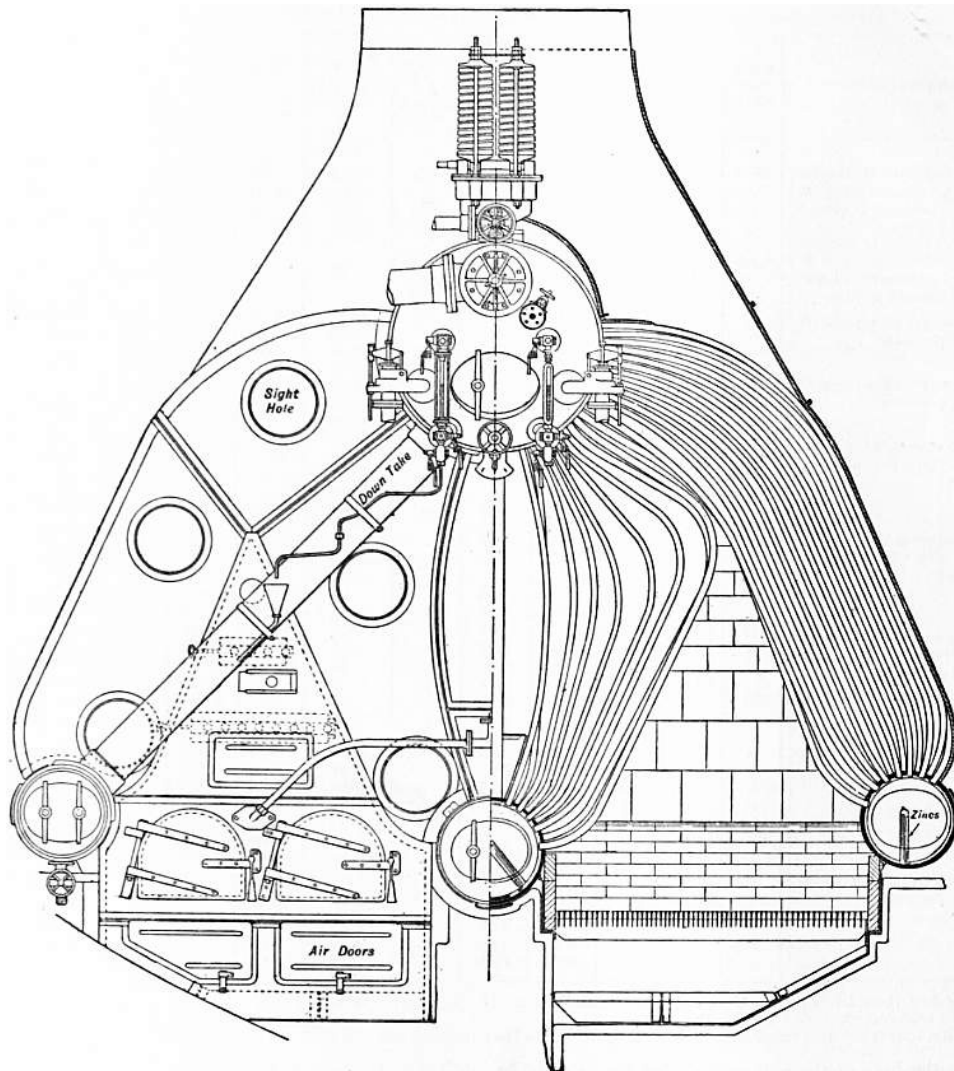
Thornycroft-Schulz Water-tube Boiler.
